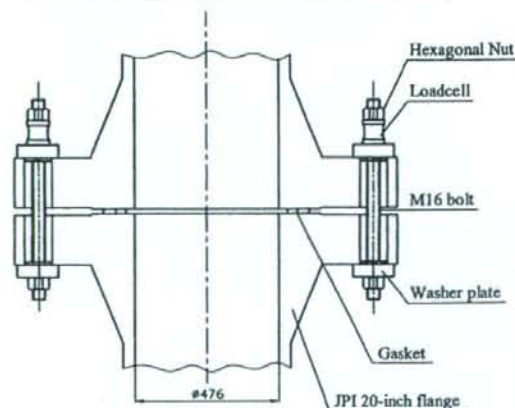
Flange joint with spiral wound gasket. (20-inch flange)
